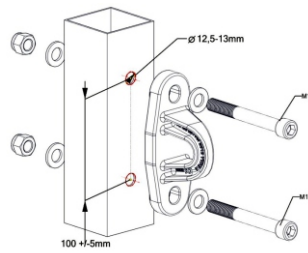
Installation of bolt fasteners with anchor point on steel structure
